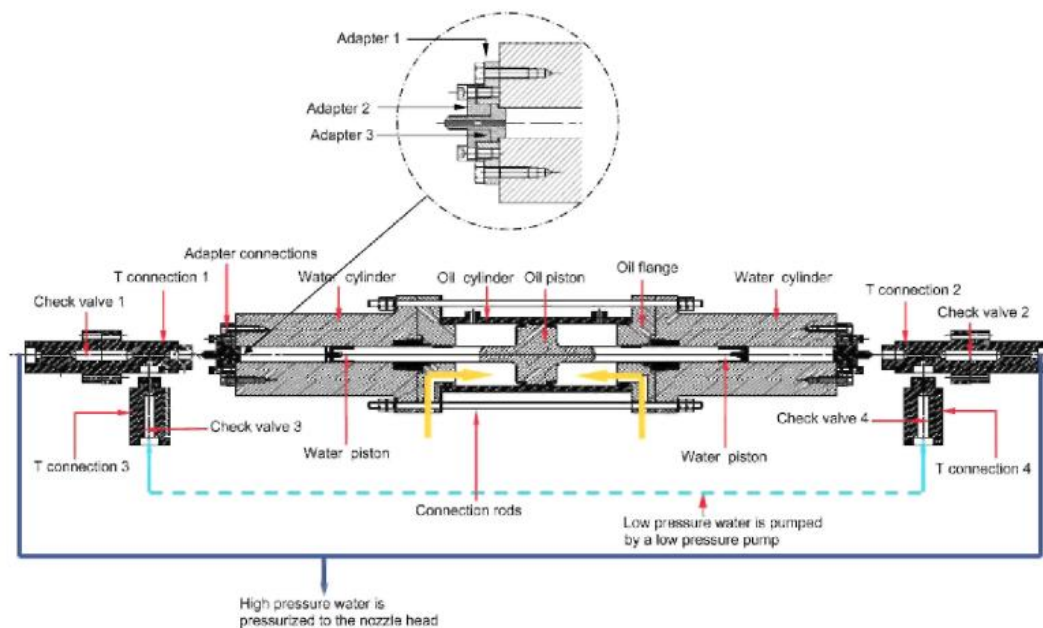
First alpha-prototype WJM system intensifier and auxiliary parts.
